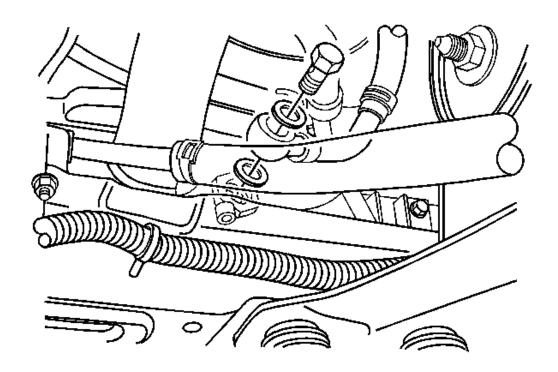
Checking For Gap Between Cap & Fitting Courtesy of GENERAL MOTORS CORP.
